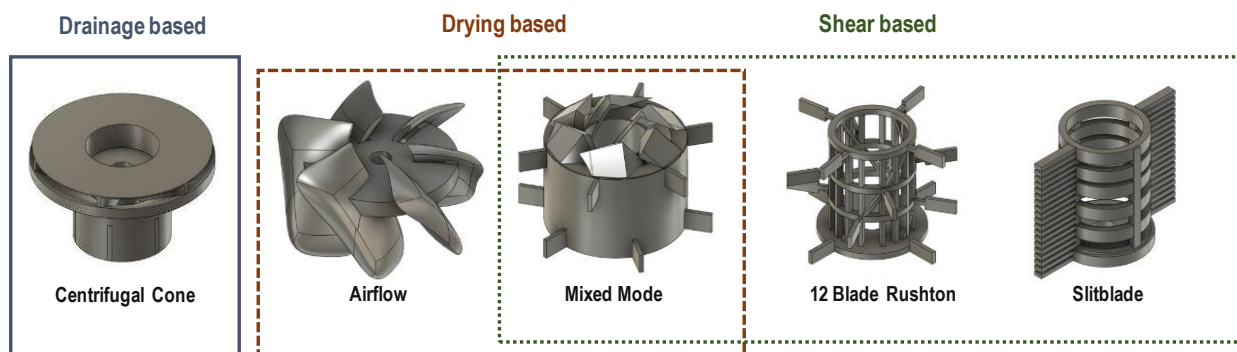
Drawings of the 3D printable headspace impeller designs. They can be grouped according to the foam breaking mechanism that was focussed on with the design. The “Centrifugal Cone” is similar to an inverted hollow spinning cone [59]; The “Airflow” design used large angled paddles designed to produce a downward airflow; The “Mixed Mode” had an inner part fashioned after a turbine to produce downward airflow, as well as Rushton Blades along the outer edges; The “12 Blade Rushton” stacked three rings of 4 Rushton blades; The “Slitblade” is based on the comb design by Deshpande et. al. [20] which showed superior foam breaking capability compared to standard impellers. This version increases the number of cones vertically.
